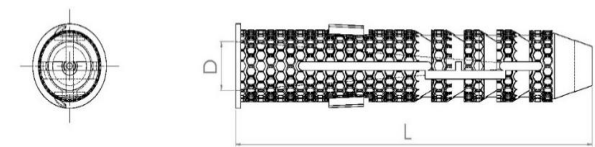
All dimensions of the fish drywall anchor are in (mm).
